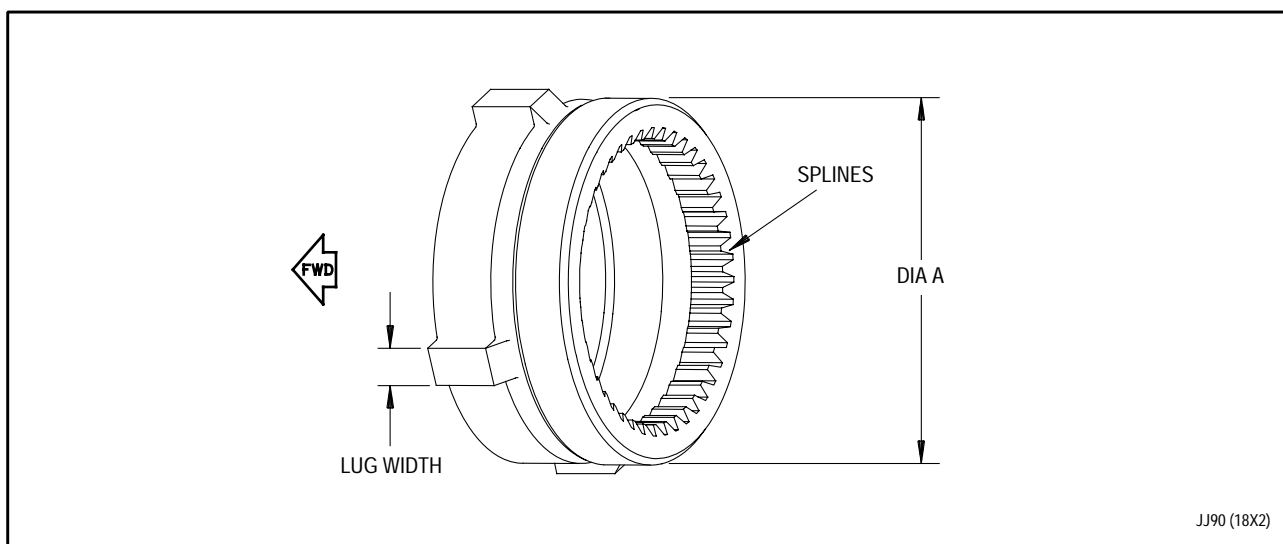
Turbine Shaft Lock Seat - Blend Repair
